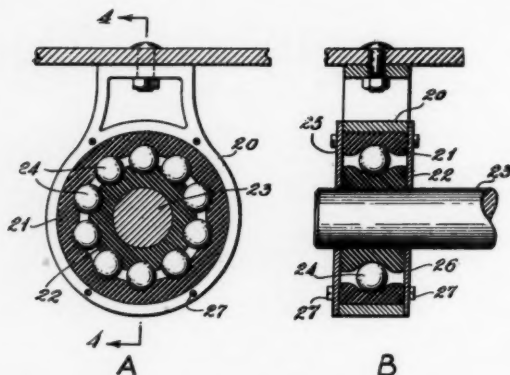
Two views of rolling bearing which incorporates resilient races, etc.
